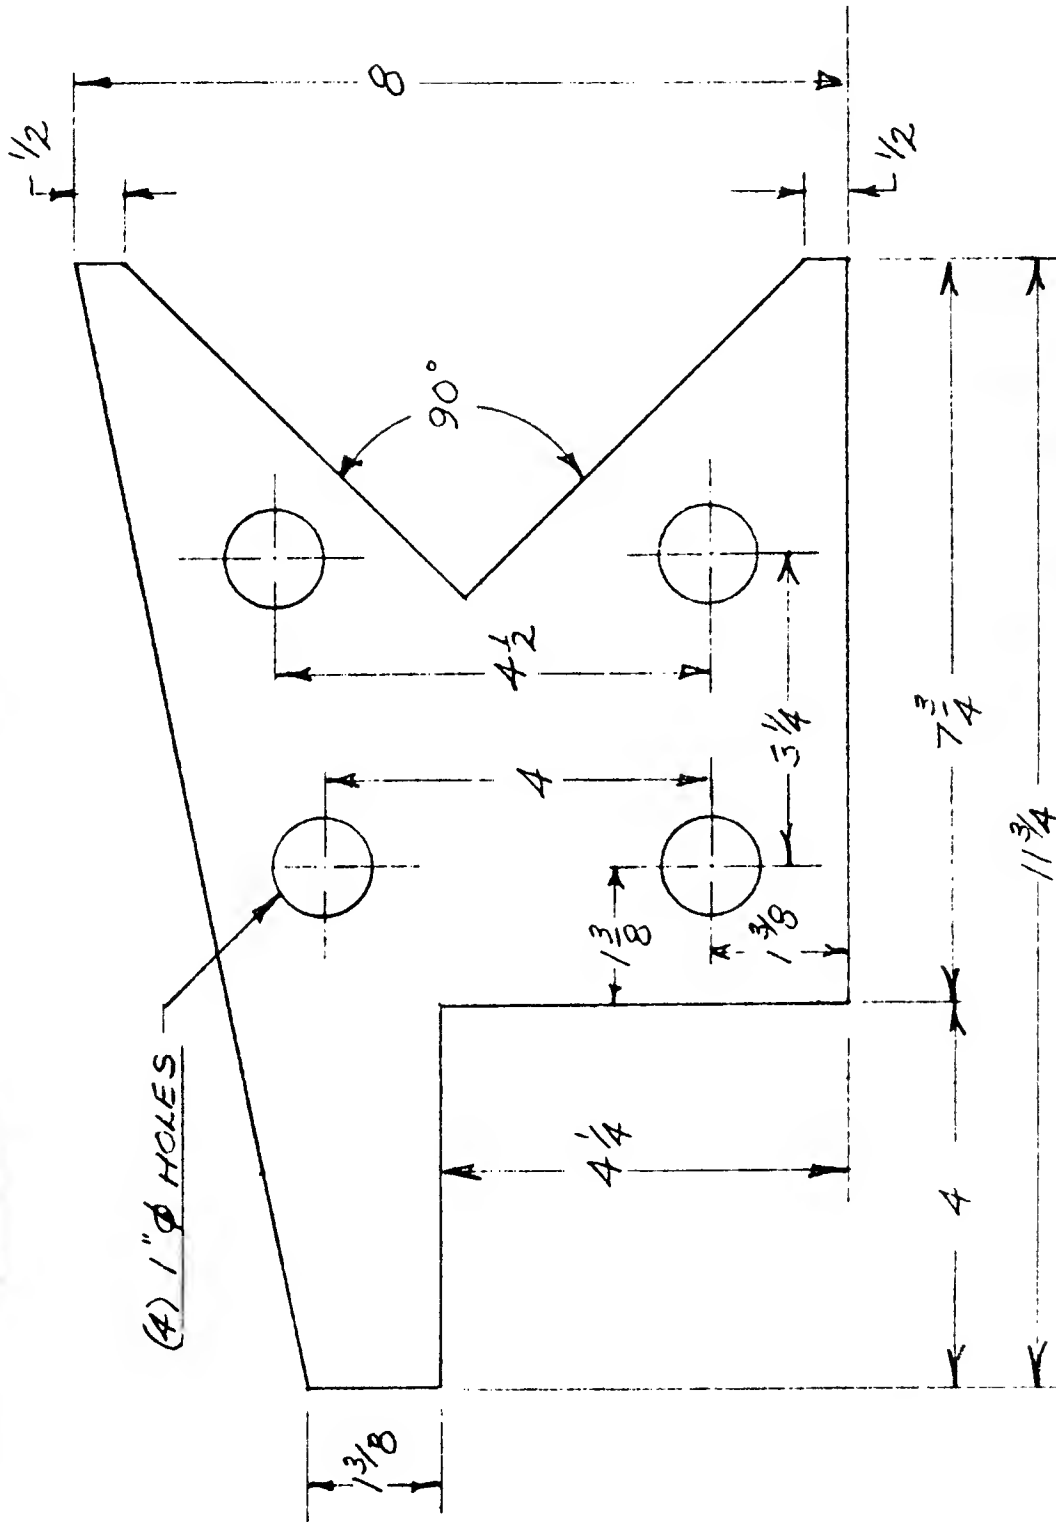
Fish Tail Doubler Plate for Reinforcing the Joint Between the Shear Center Bracket and the Compression Member. Added in 1959.
